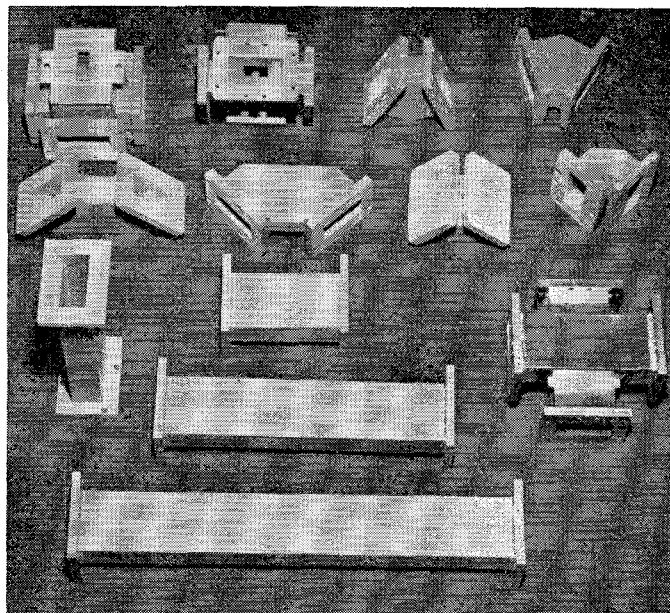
Precision waveguide assemble fabricated by casting (upper) and by brazing and broaching (lower).
